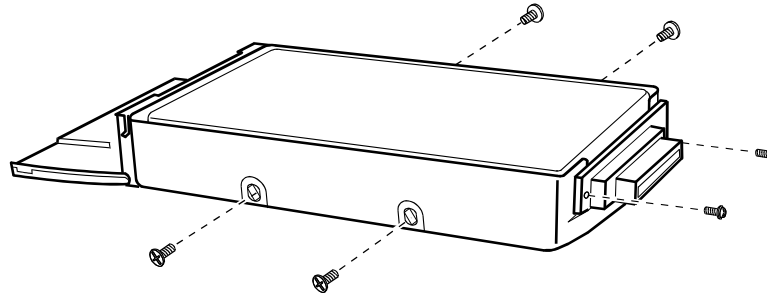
REMOVING THE HARD DISK DRIVE BRACKET
